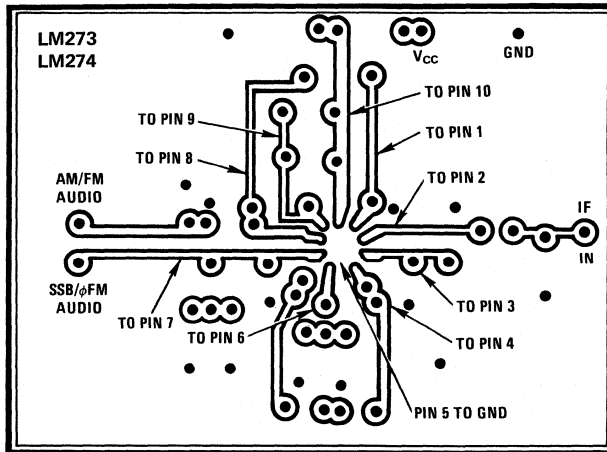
Printed Circuit Board for AM, FM, or SSB
